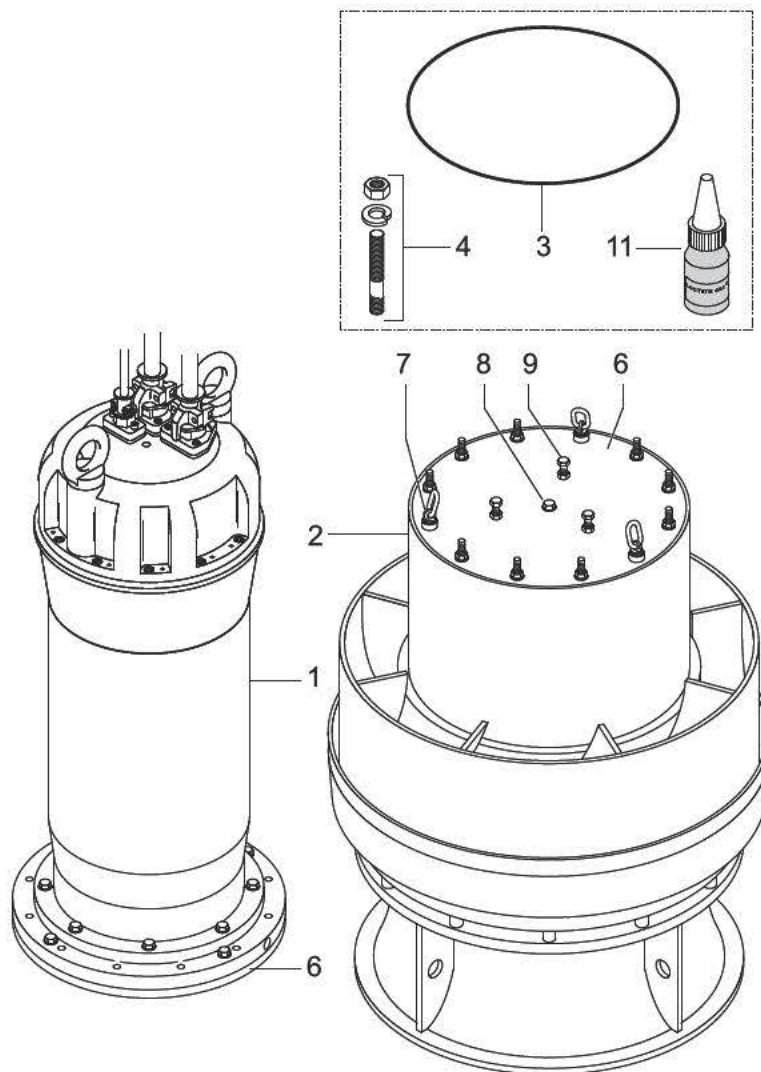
Assembling the motor and the gearbox/hydraulic unit
